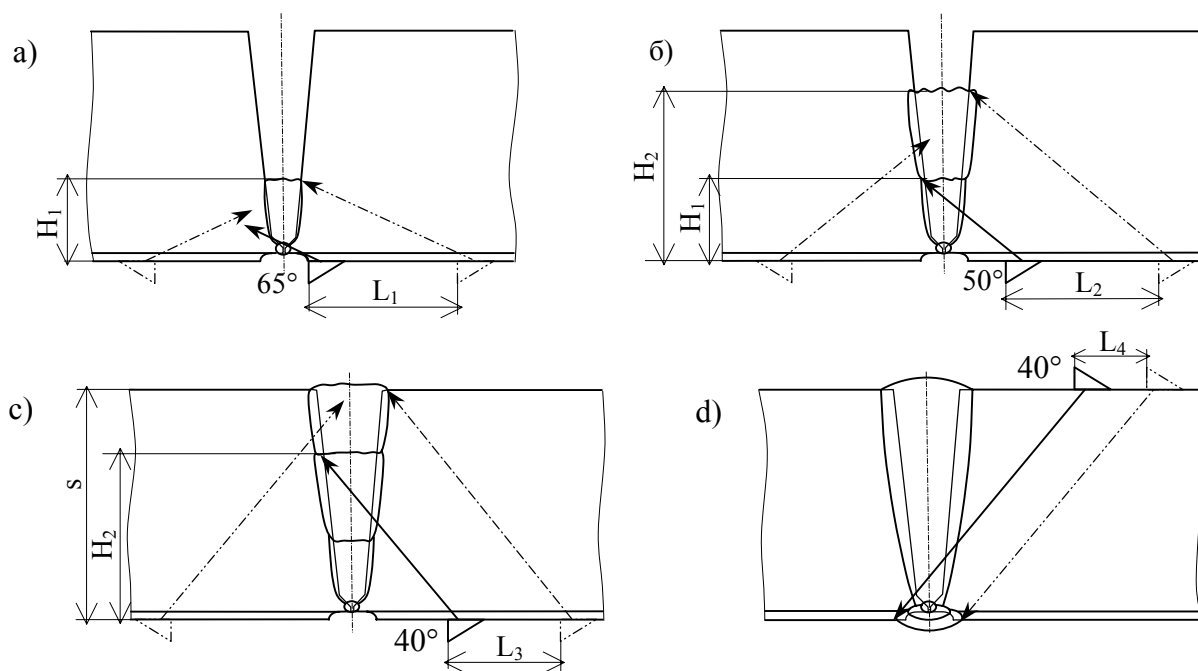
Schemes of the testing of a welded seam at stage-by-stage welding on layers
